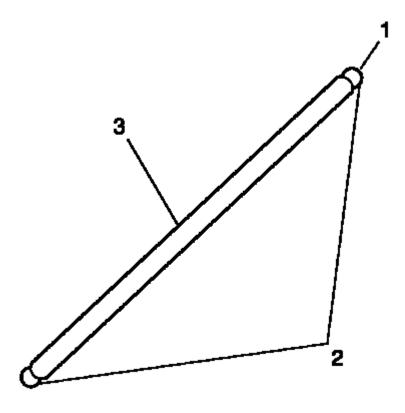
Pushrod Inspection Areas Courtesy of GENERAL MOTORS CORP.
